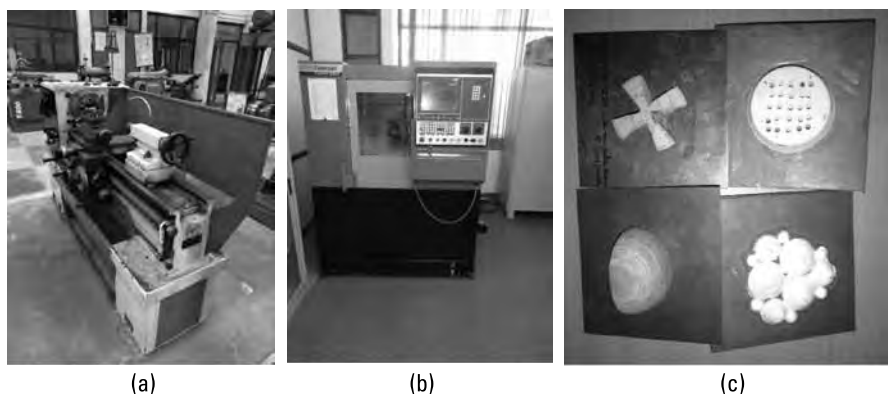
(a) shows a conventional lathe machine operated mechanically, and Figure 6.3(b) shows a computer-controlled lathe machine; Figure 6.3(c) depicts the various DRAs fabricated on the lathe machines. The DRAs, referenced from [25–28], are all fabricated from Rogers Corporation ceramic materials and FR 4 material.
